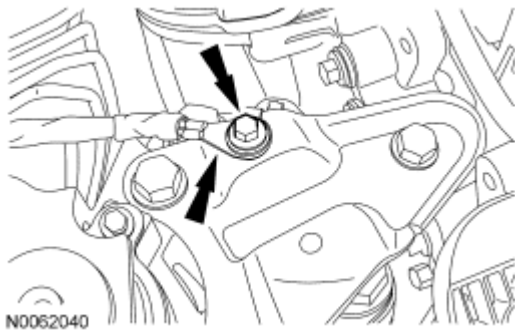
Identifying Ground Wire Bolt From Engine Mount Brace
